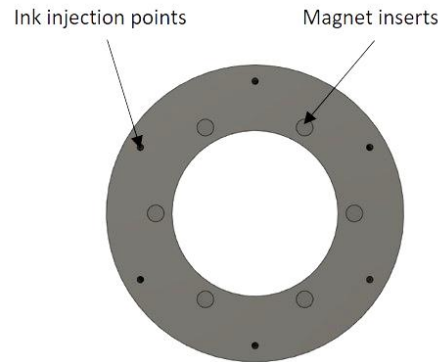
Bottom view of nozzle displaying 6 ink inputs (outer) and 6 magnet inserts (inner)
